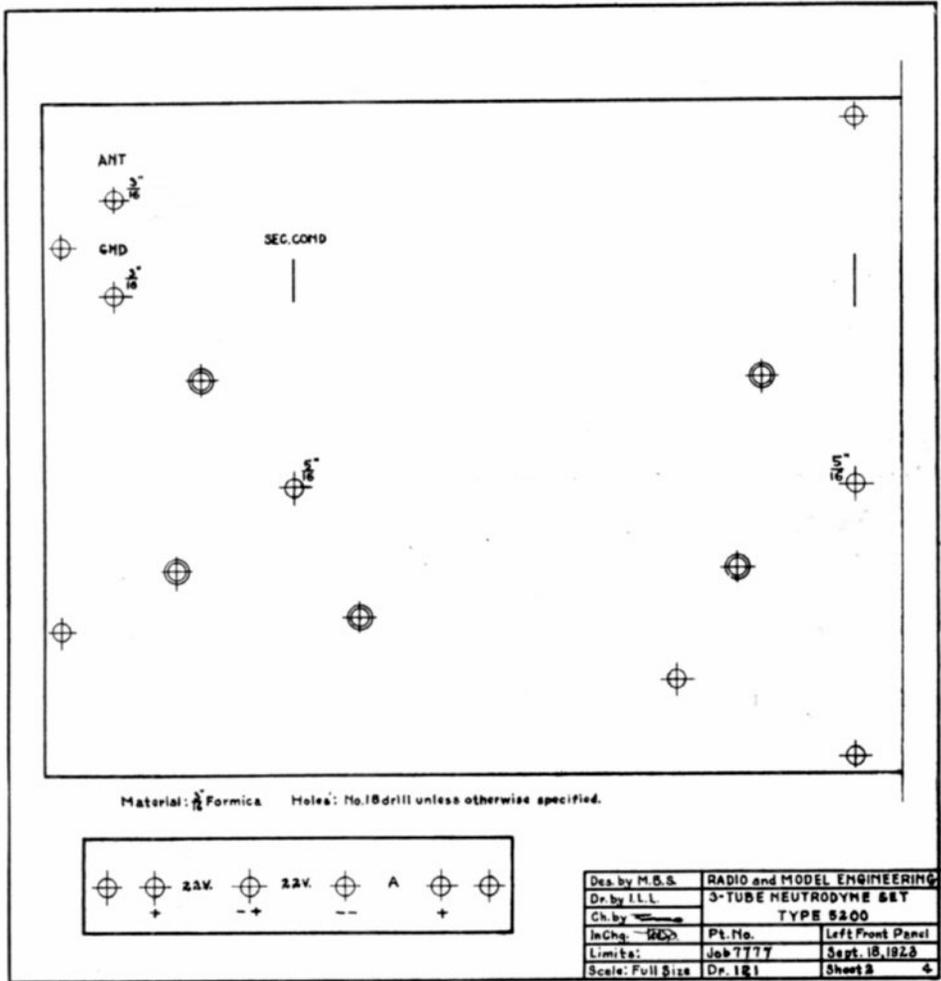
Left hand half of the front panel, and the terminal panel, shown at one-half scale. All dimensions taken from this drawing should be doubled
